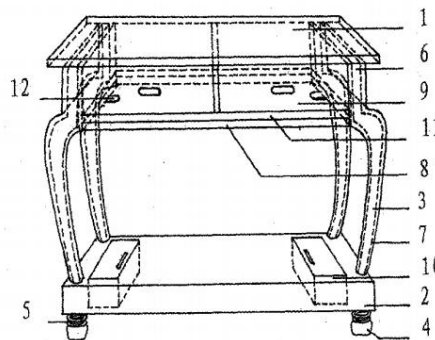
1-Table surface; 2-Buffer space; 3-Table legs; 4-Buffering fixture; 5-Buffer device; 6-Impact fixing device; 7-Impact cushioning material; 8-Table bottom fixing surface; 9-Table bottom; 10-Emergency water; 11-Joiner mechanism; 12-Vent hole.
